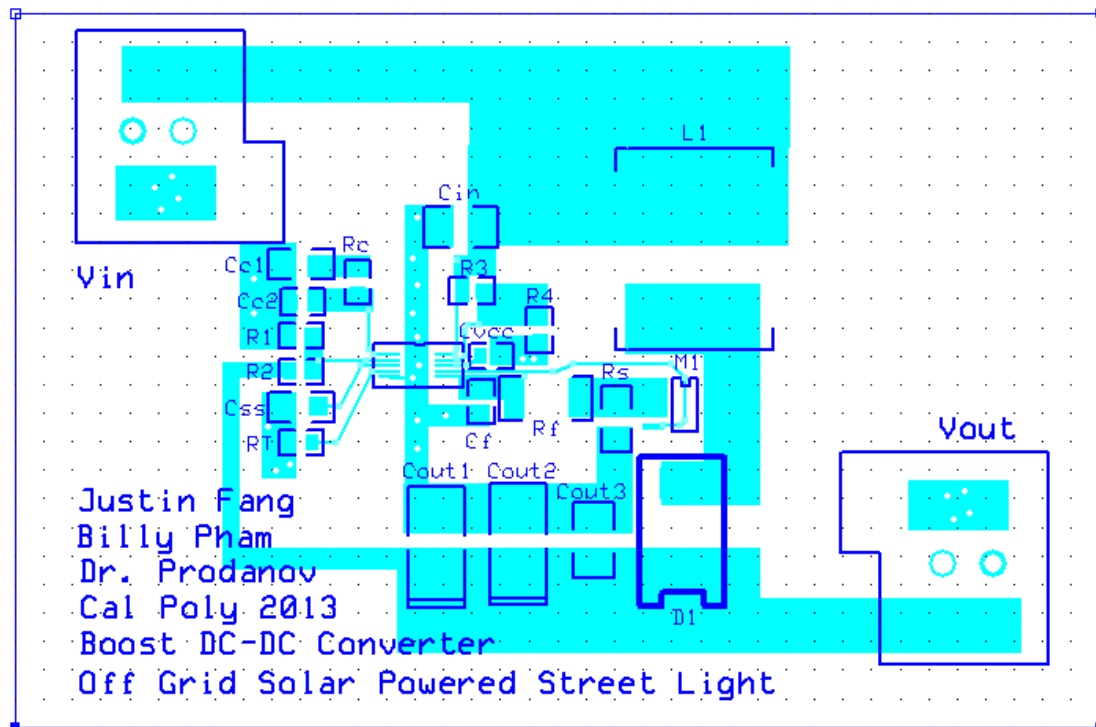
Boost DC-DC Converter PCB Layout Design with ExpressPCB
